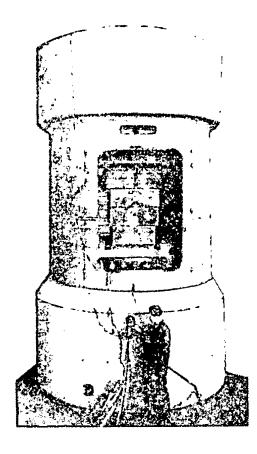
USSR: 15,000-Ton Press of Prestressed Concrete Construction
